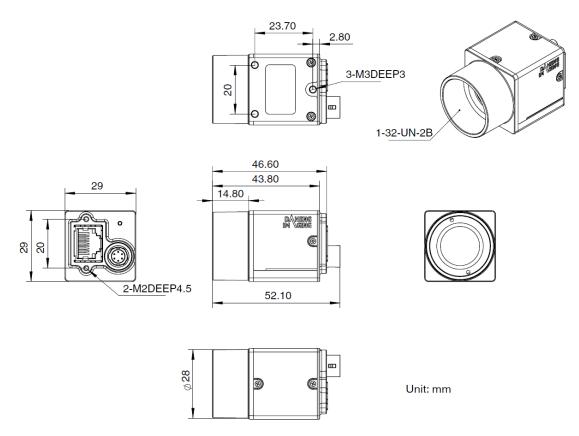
ME2C-532-22GM/C mechanical dimensions
